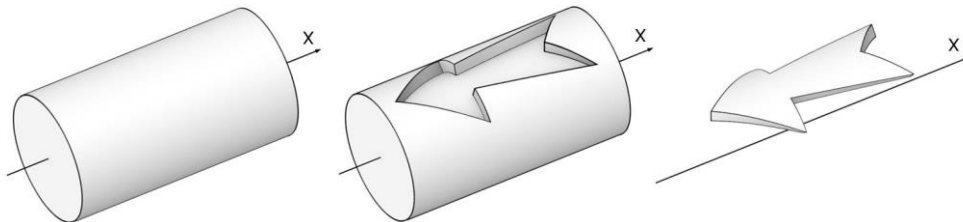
(left) blank workpiece; (middle) target geometry; (right) ablated volume
